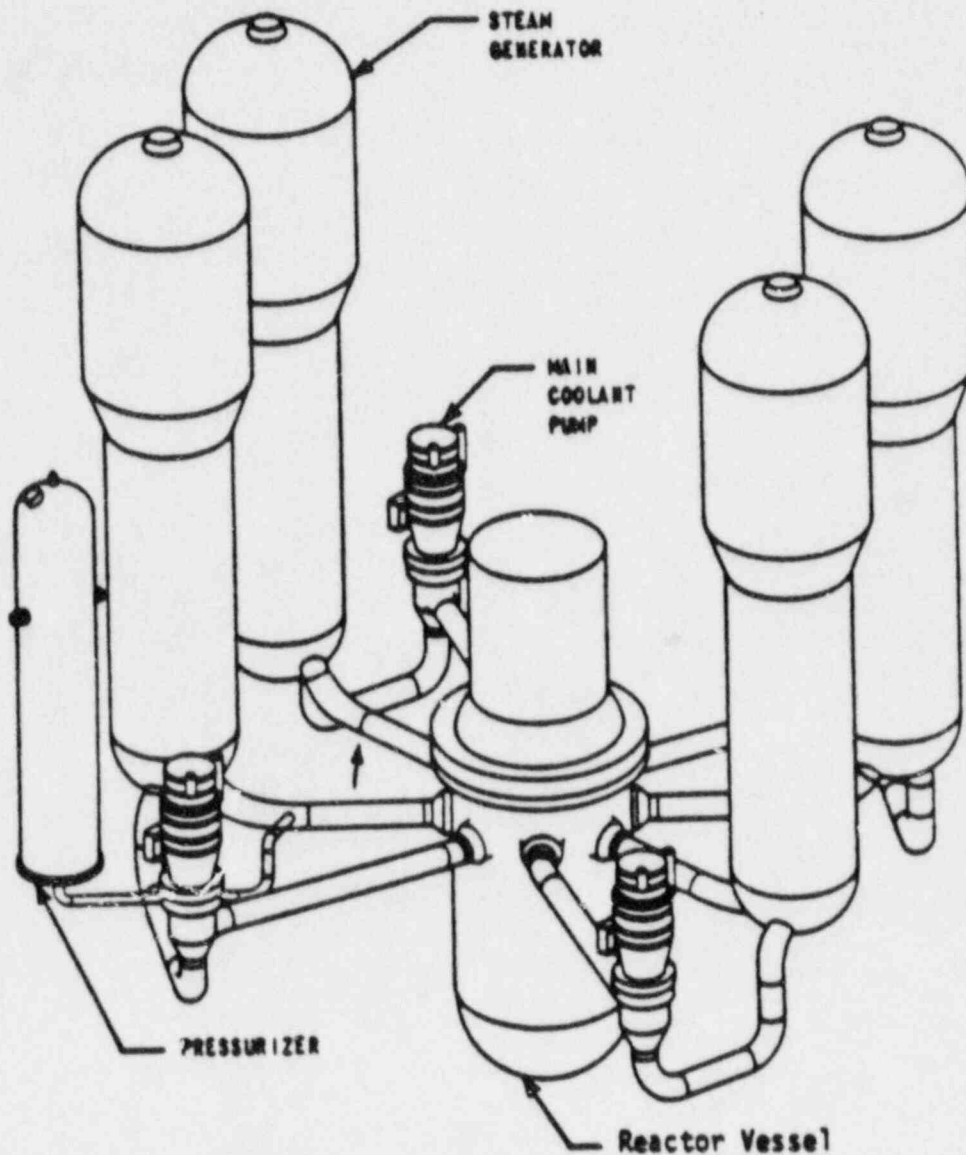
Geometry and Location of Inlet Nozzle Elbow to Pipe Weld
